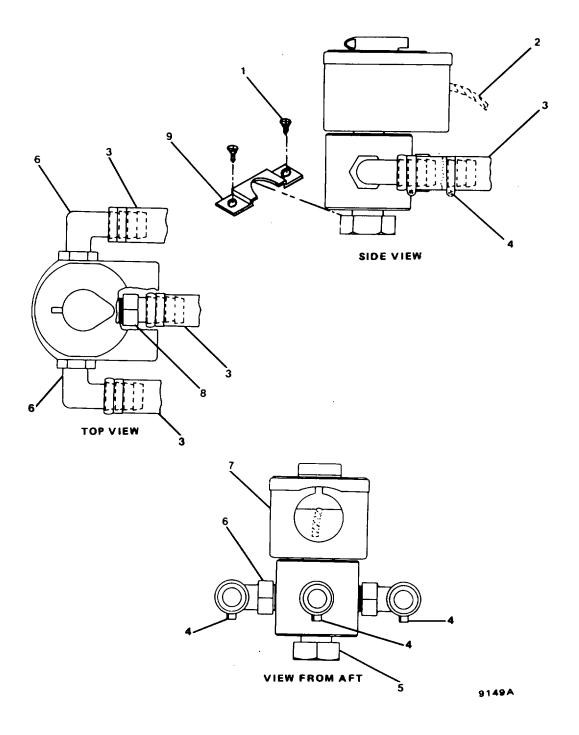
Solenoid Valve Assembly Repair (Sheet 2 of 2).
